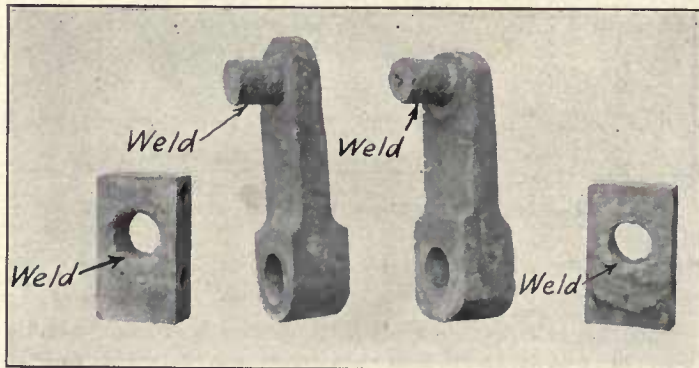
Hangers Shown in Fig. 419 with Metal Welded On.
